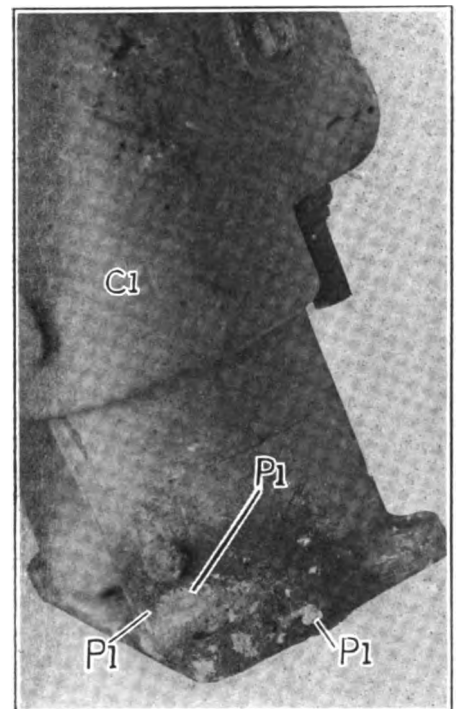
Completed repair before filling up. After this has been done it is impossible to see the join.
